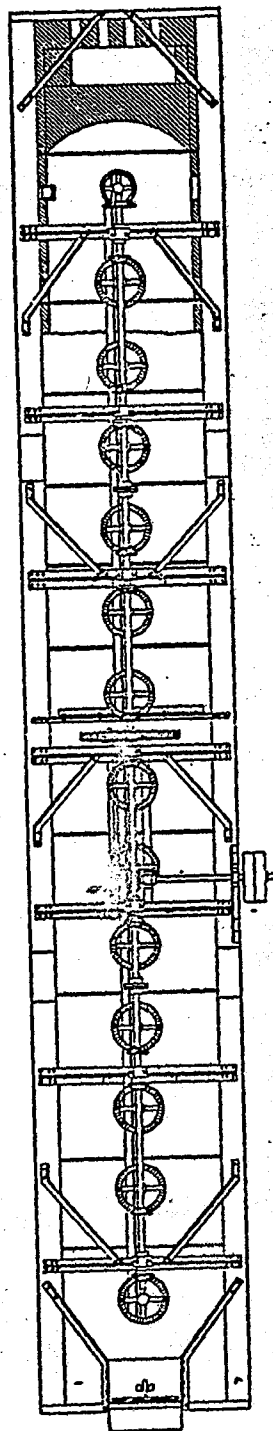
Plan of Furnace Part in section, showing Fireplace and Discharge Opening.
